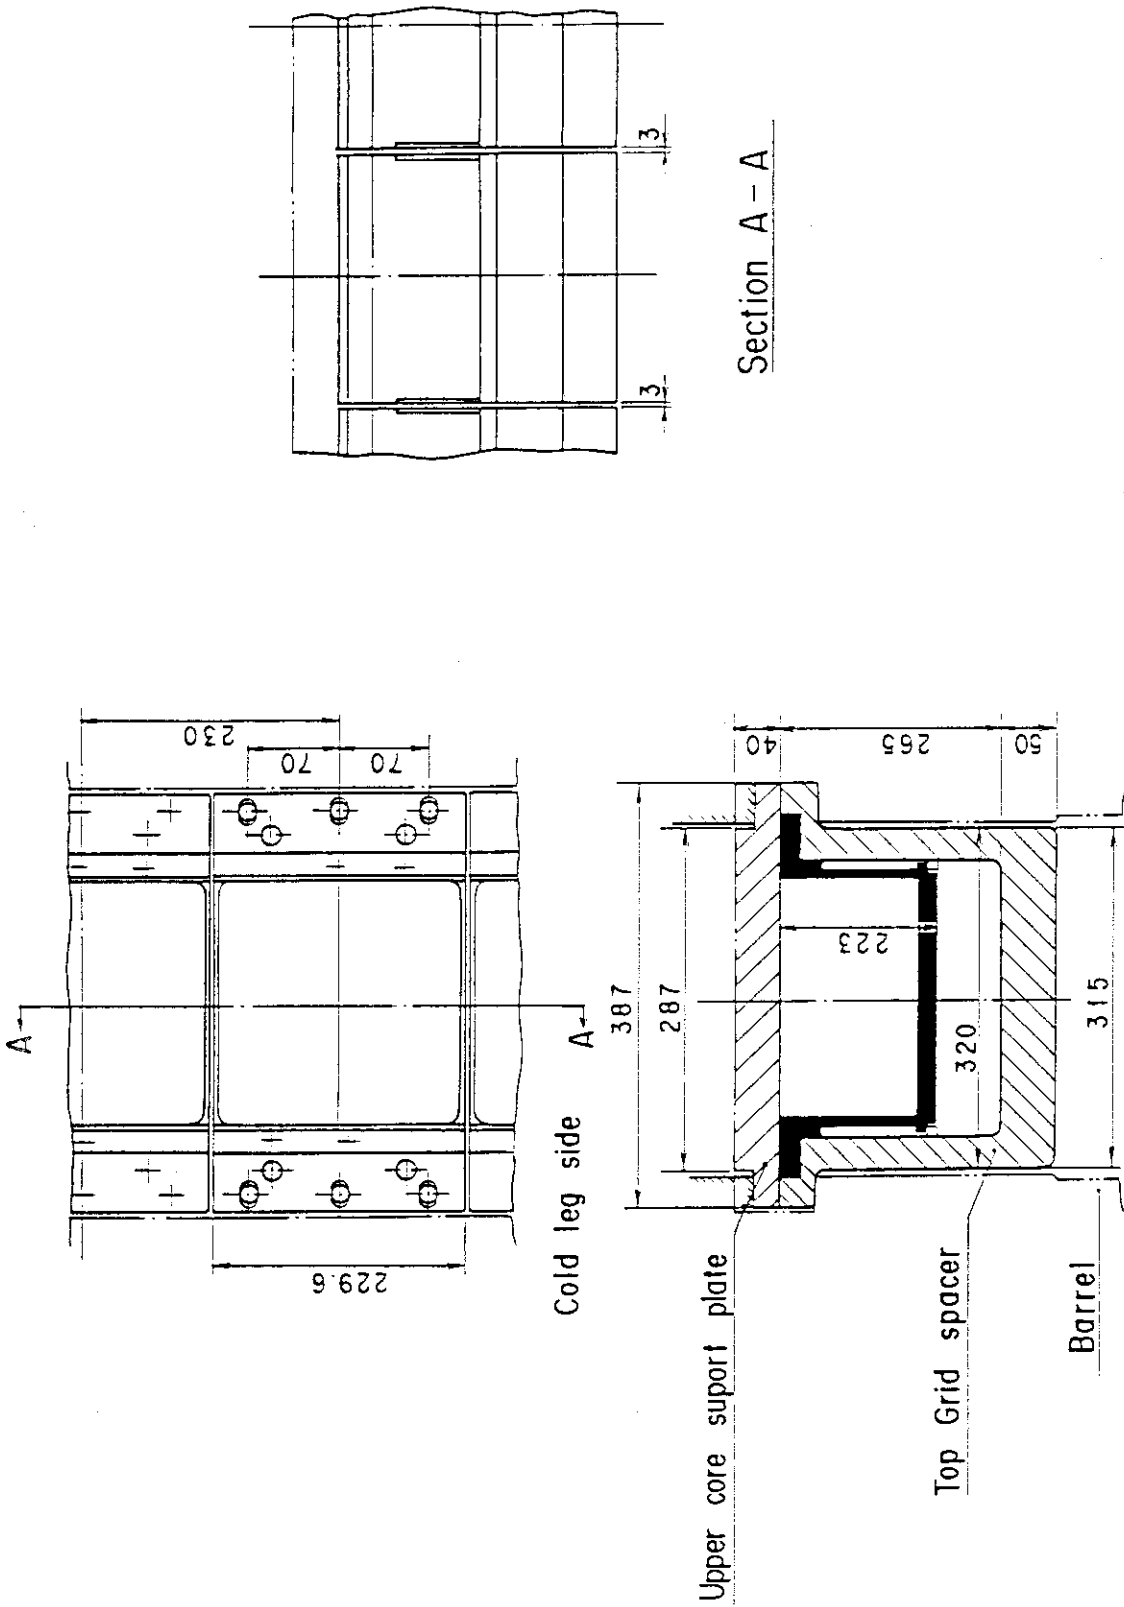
Arrangement and Principal Dimension of End Boxes and Top Grid Spacers
